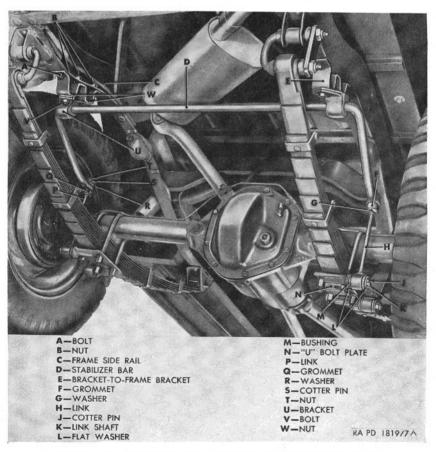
Stabilizer bar, brackets, and link M170-rear.
